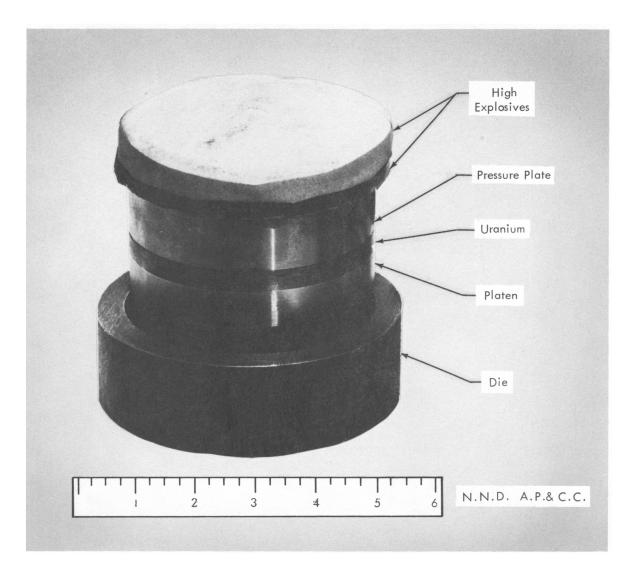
TEST COMPONENTS ASSEMBLED IN SEQUENCE.
